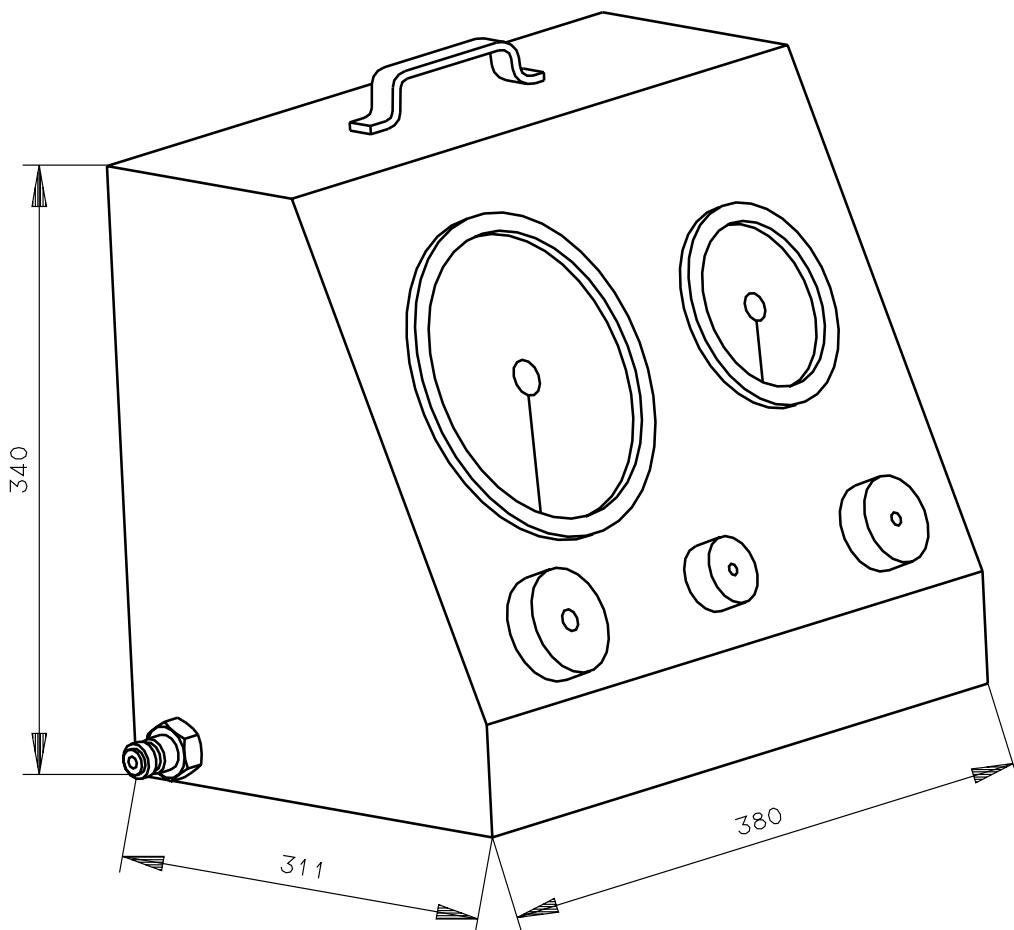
Dimensions and masses of tools (for guidance only)
